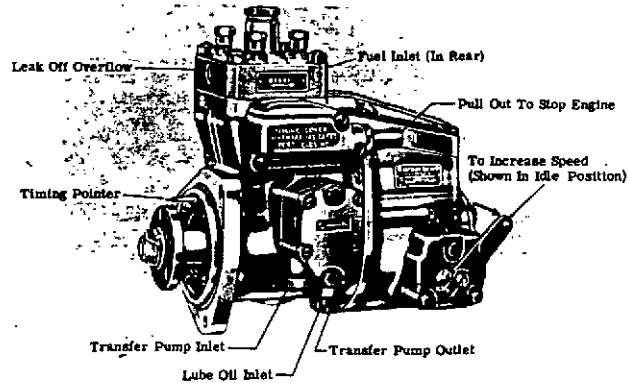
Bosch PSB Fuel Injection Pump & Governor
